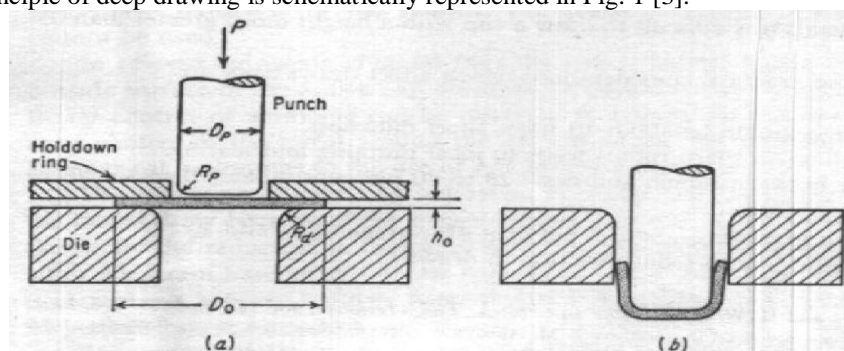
Deep drawing of a cylindrical cup (a) before drawing and (b) after drawing [3]
